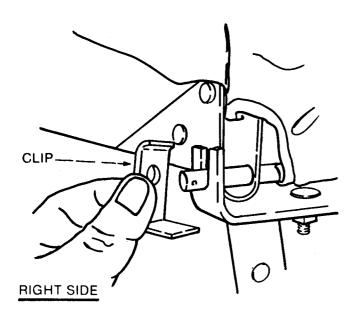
BAG-N-WAGON CART ASSEMBLY DETAIL
